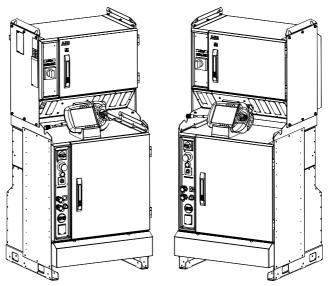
Spot Welding cabinet with robot controller cabinet.
